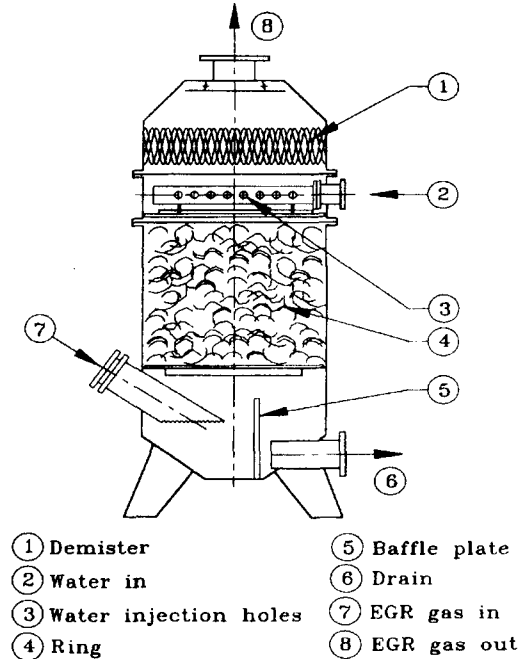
Assembly of a novel diesel soot removal system with a cylinder-type scrubber
